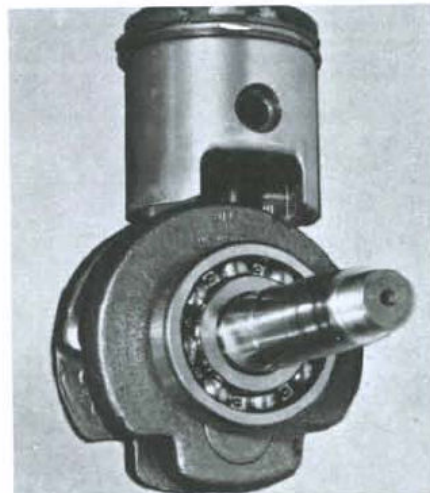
Crankshaft and piston unit used on L340 engine. Other models with full circle crank are similar.
